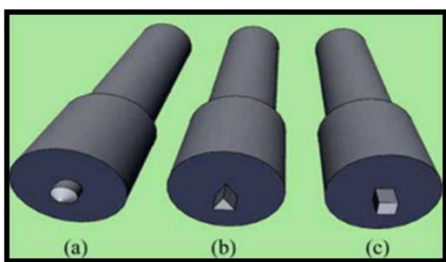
(a) Threaded tapered cylindrical pin shape T1, (b) Triangular pin shape T2, (c) Square pin shape T3 [30].
